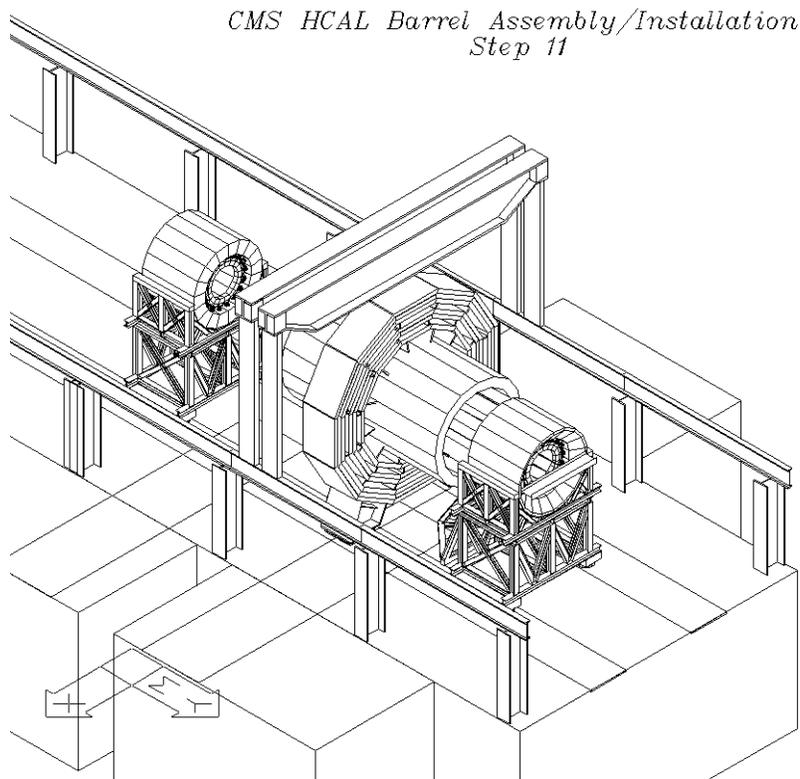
CMS HCAL barrel assembly / installation step 11.
